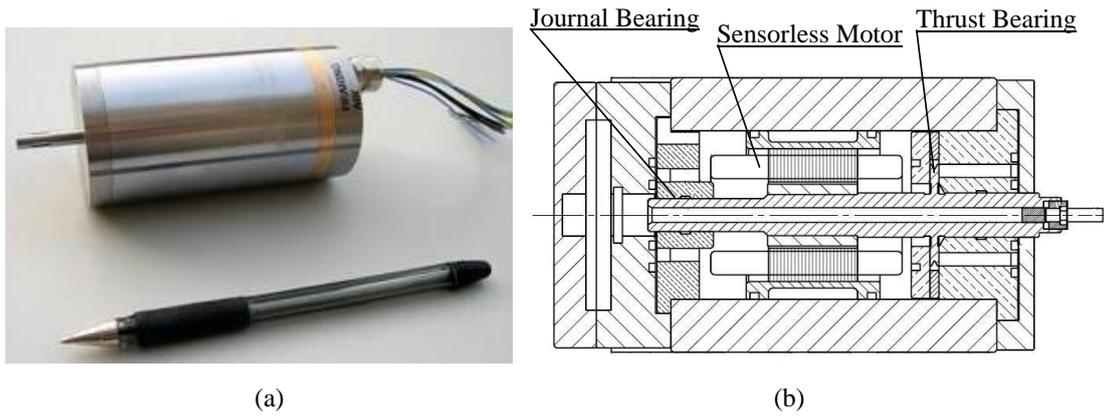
The ultrahigh speed aerostatic bearing spindle driven by a sensorless DC motor (UPM Ltd.) (a) Photograph of the developed miniature spindle; (b) A schematic of the spindle
